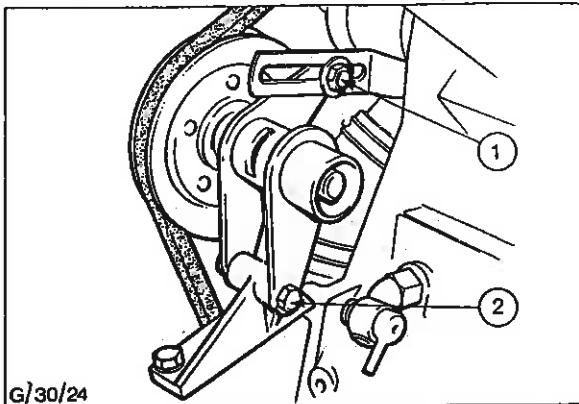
Drive Belt Adjustment - No Alternator Fitted
